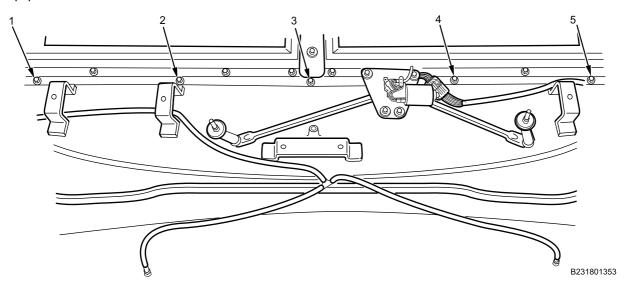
Cross-Vehicle Equipment Bracket Bolt Exterior Locations.
